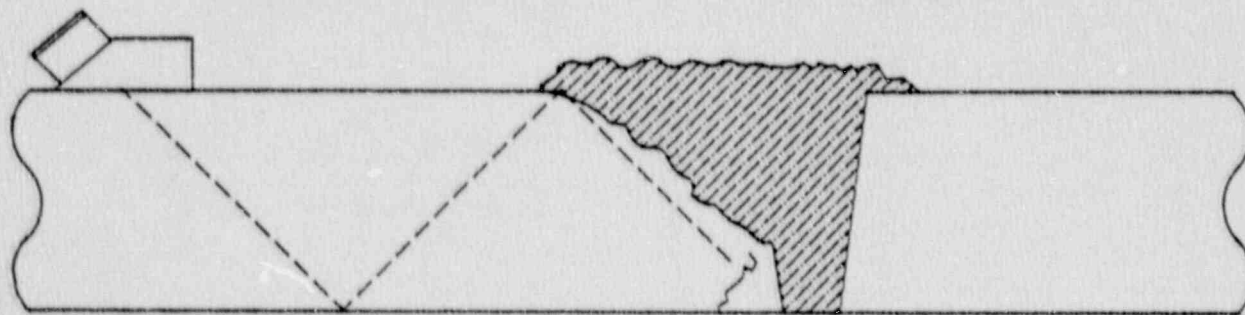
EXCESSIVE WELD CROWN
